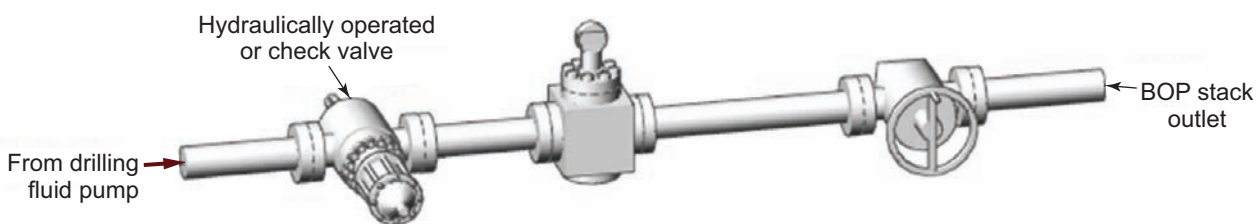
Example Kill Line Assembly for 2K and 3K Rated Working Pressure Service—Surface BOP Installations
